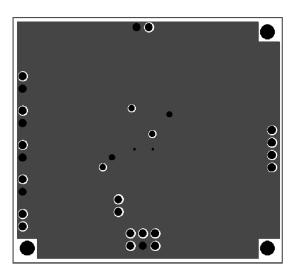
Recommended YZR PC Board Layout: Bottom Layer
